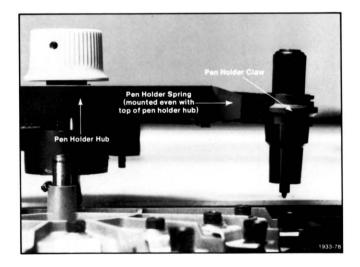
Pen Holder Hub and Pen Keeper Detail.
